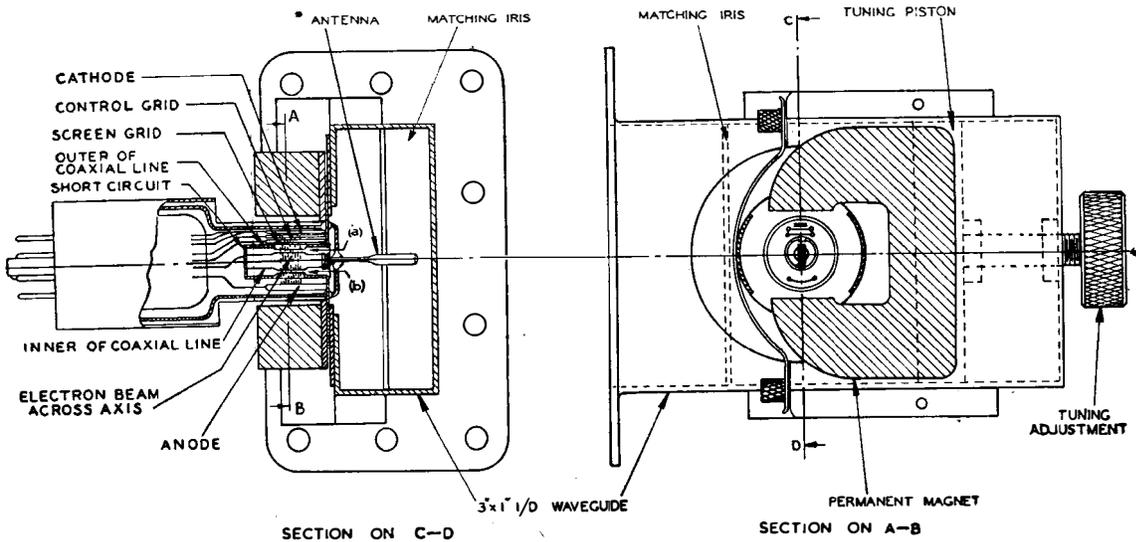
SECTION OF COAXIAL LINE OSCILLATOR, CV 230, OPERATING INTO WAVEGUIDE.
